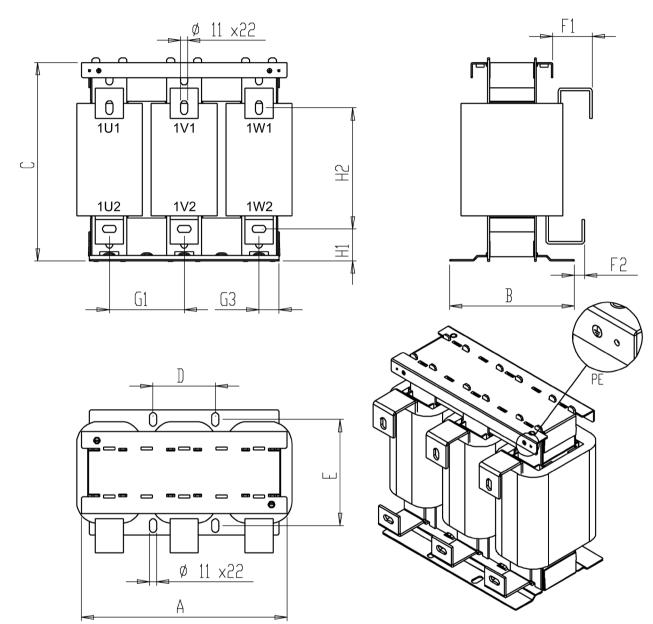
Dimension drawing of line reactor 6SL3000-0EH34-7AA0
